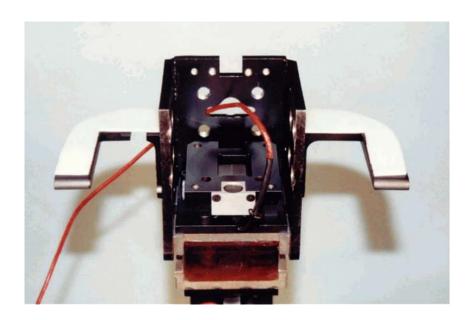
Neck Pitch Change Mechanism assembled to Upper Flex Joint
